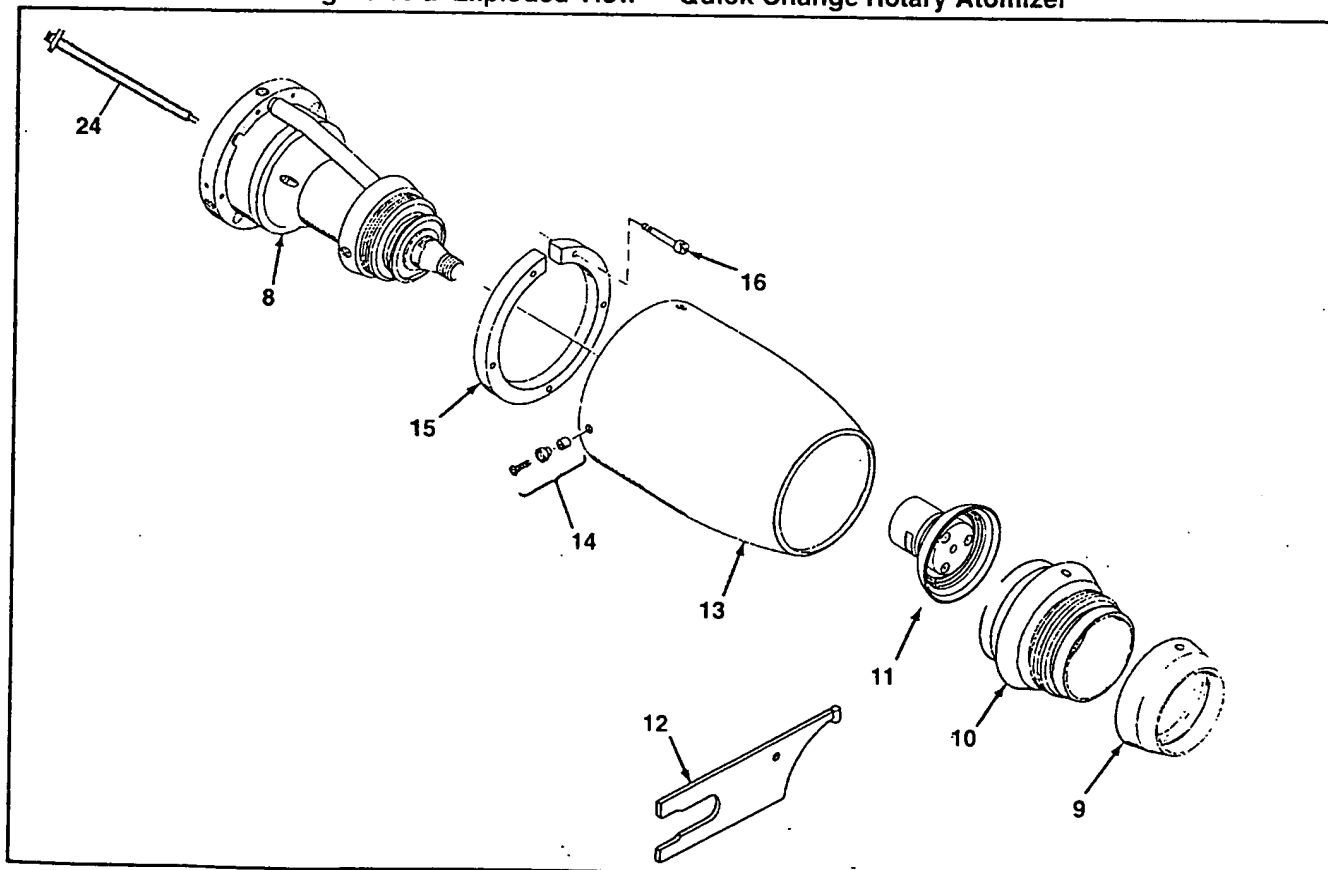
b Exploded View — Quick Change Rotary Atomizer
